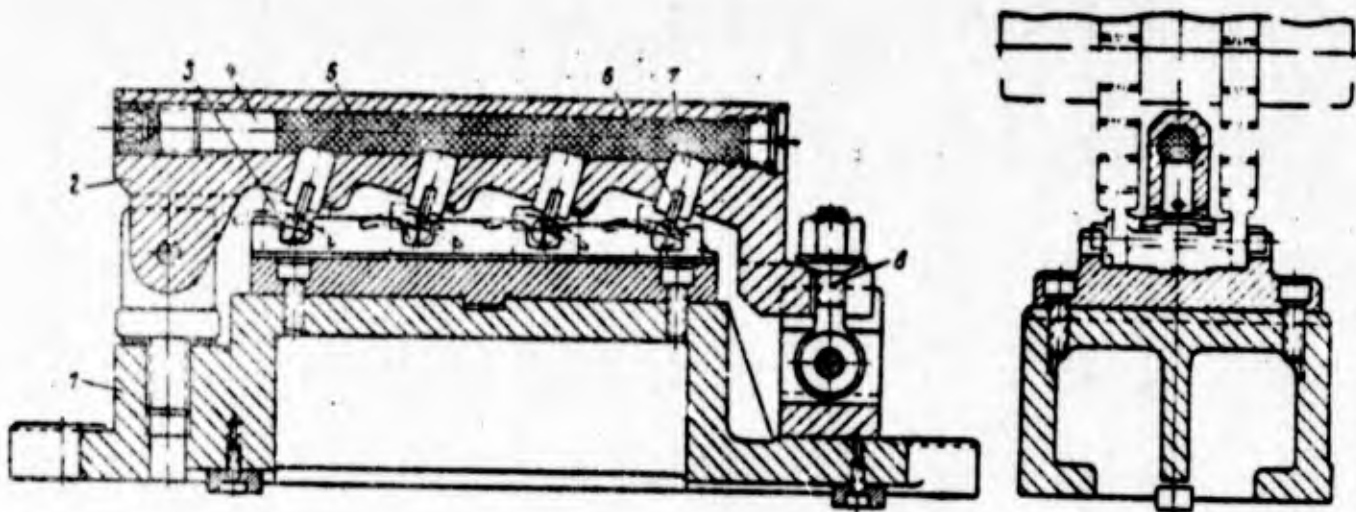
Attachment for milling shelves of stator blades for compressor. 1) body; 2) swing strip; 3) worked blade; 4) plunger; 5) hydrolayer; 6) clamp; 7) plunger; 8) swing bolt.
